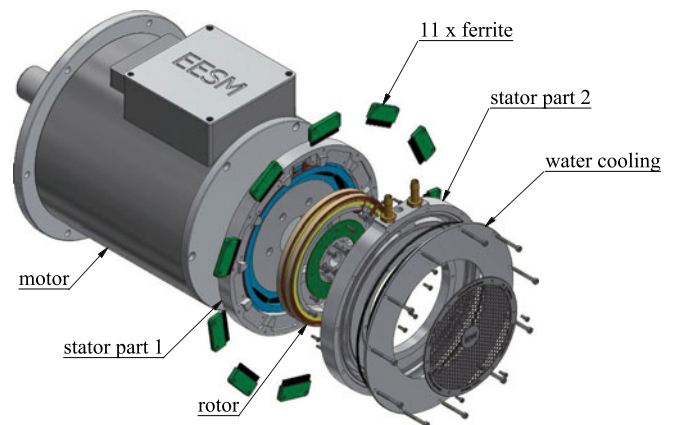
Exploded view of a rotating contactless energy transfer system.
